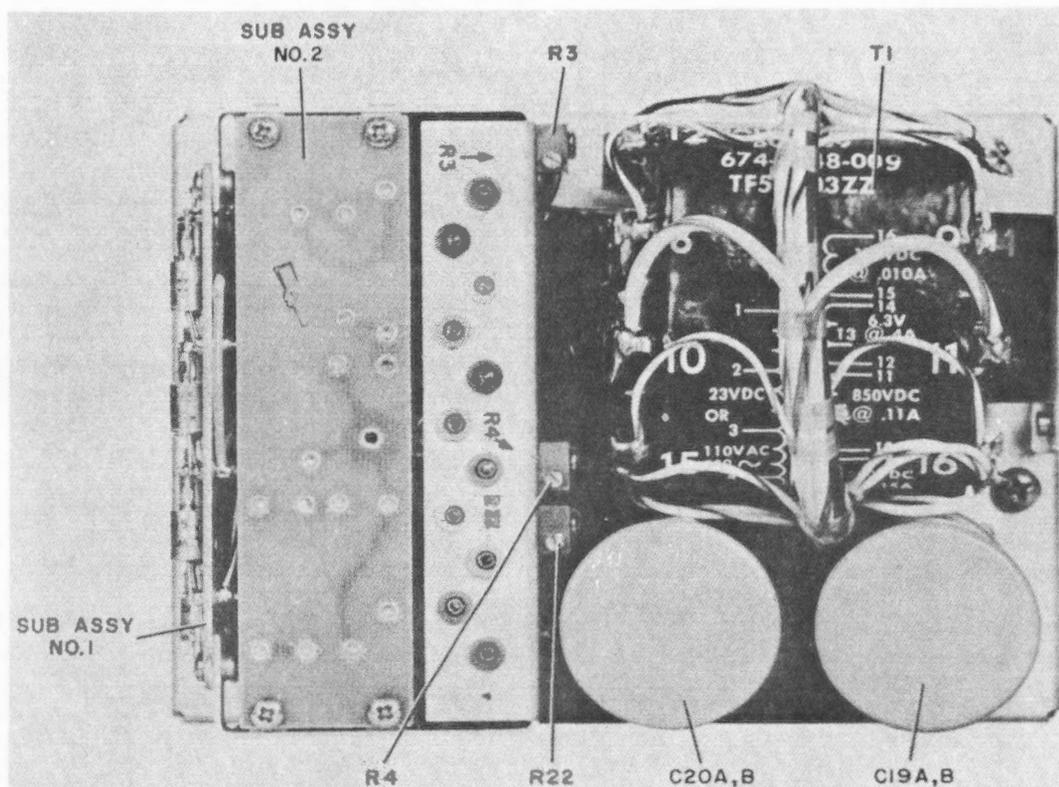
Power Supply PP-3518/PRC-47 (A5), Top View, Location of Major Components and Component Mounting Boards
